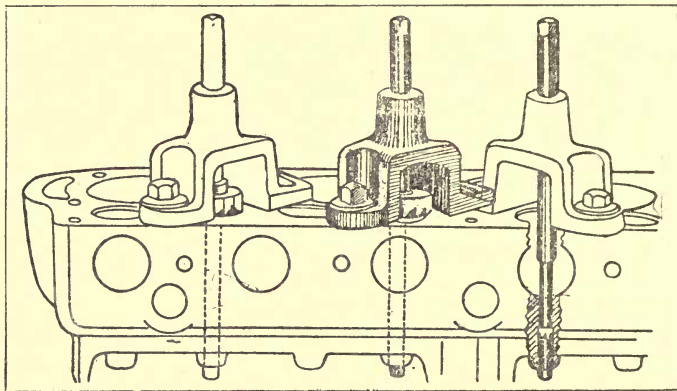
A tool for renewing the valve ports, the left showing the port enlarging tool, the center the reseating tool and the right the guide reamer
